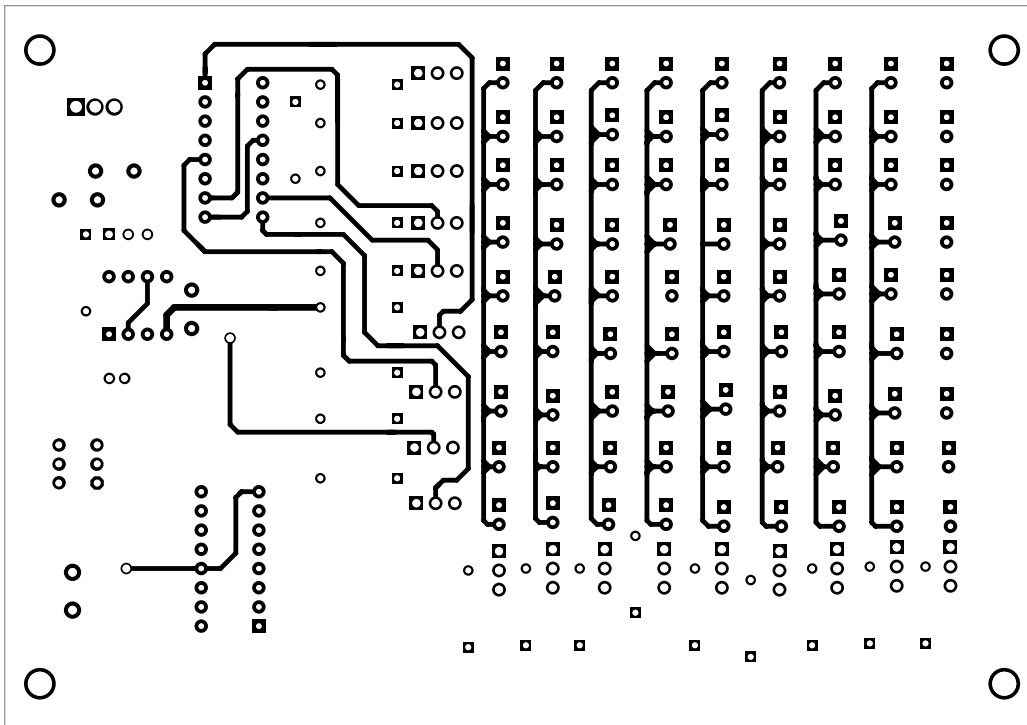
Actual-size, top-side of the PCB shown in Fig. 3
